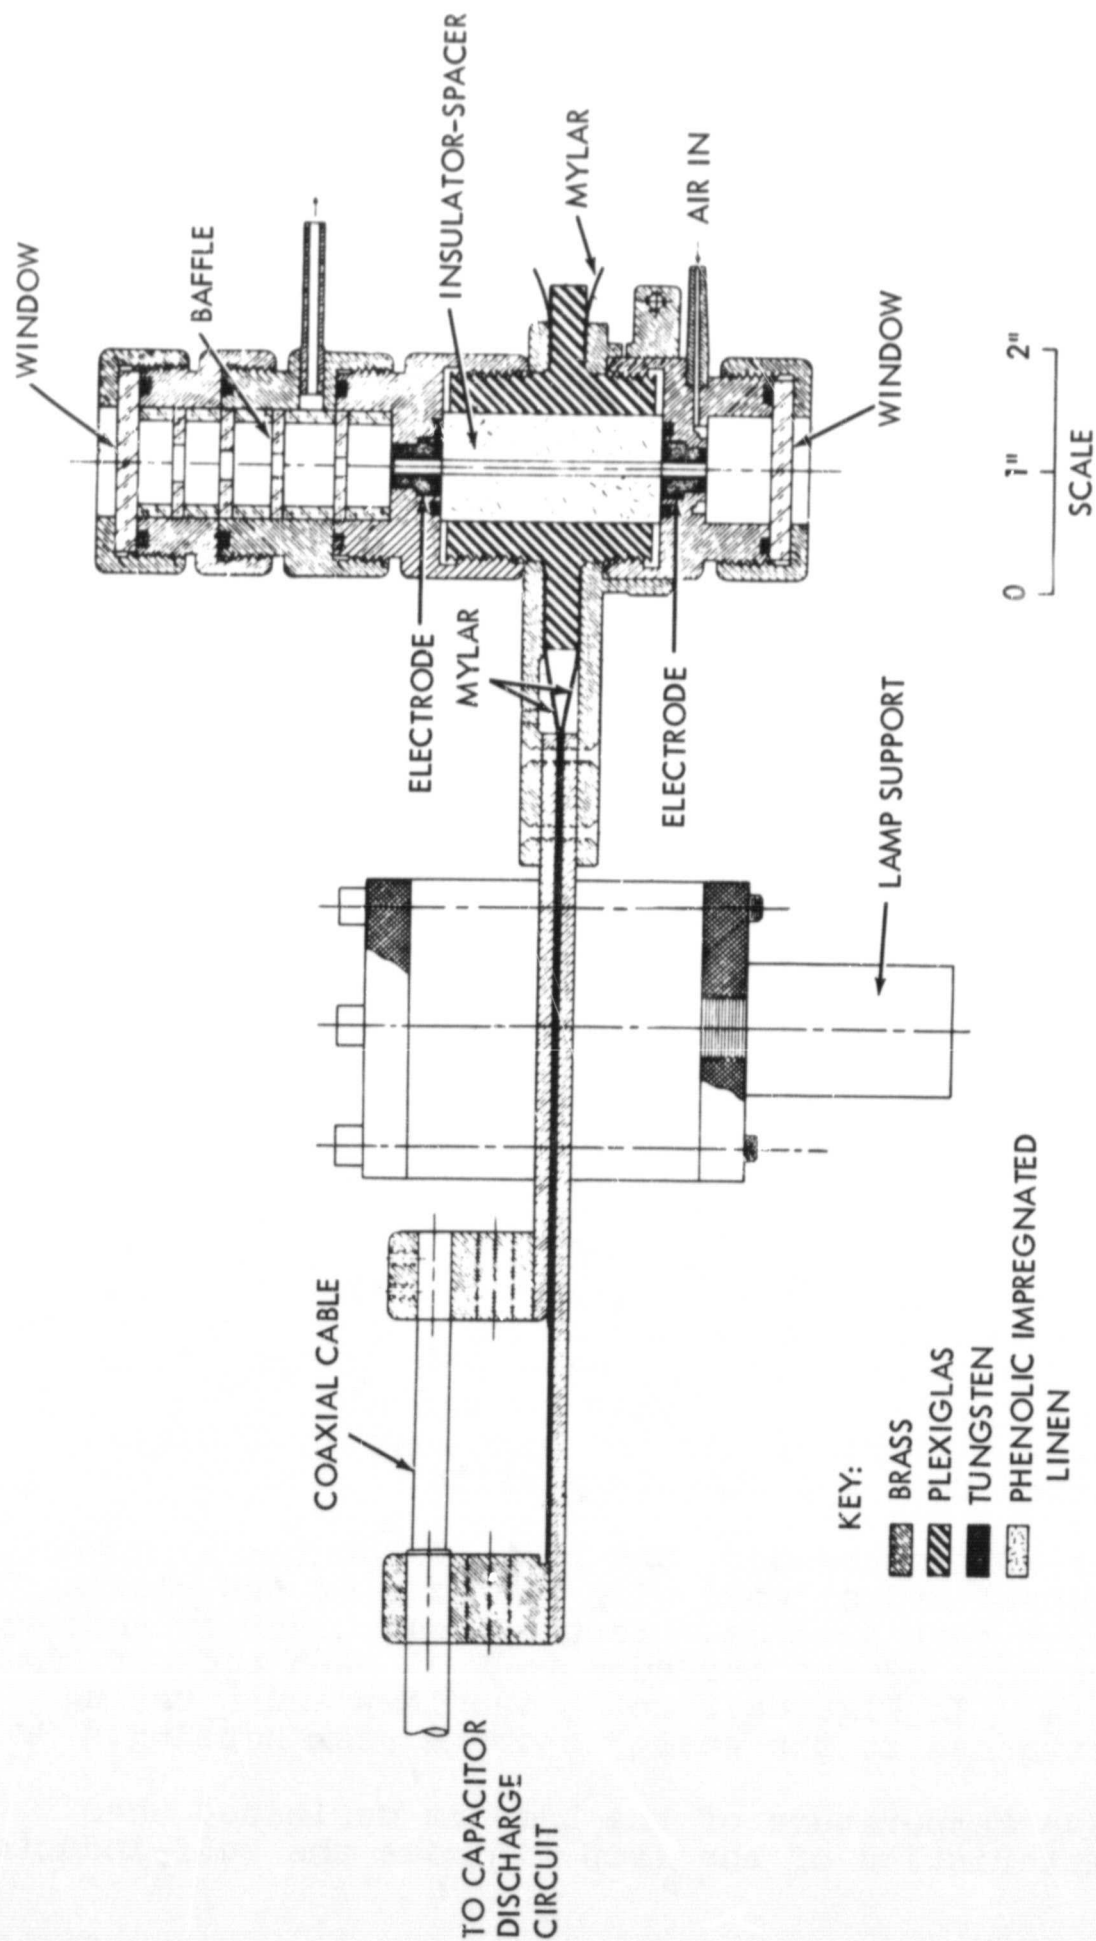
HALF-SECTION OF FLASH LAMP ASSEMBLY
